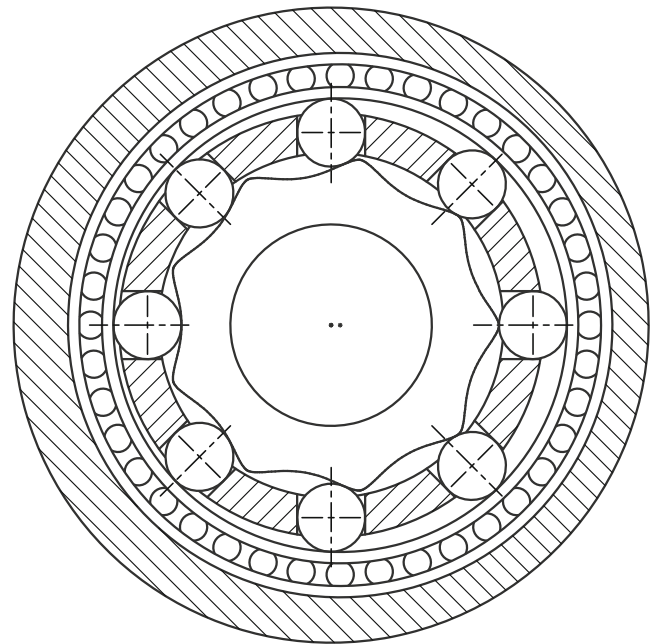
Rolling element eccentric drive with an inner gear and outer crank with $n=8$, $z=9$
